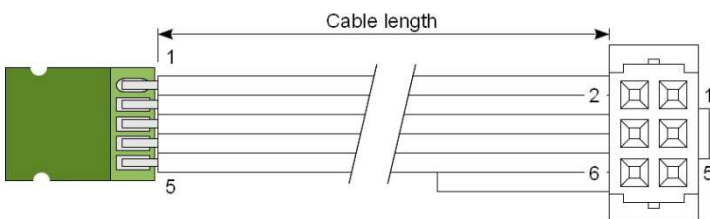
Encoder with flat cable (pitch 1.27 mm) and 6-pin connector DIN41651.
